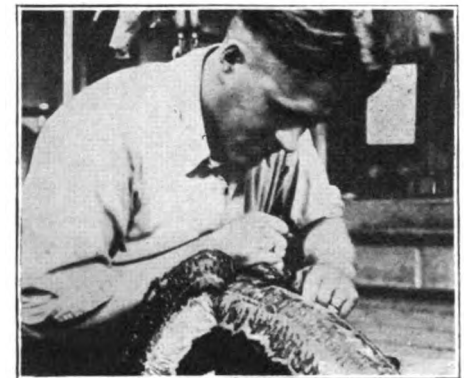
It is Frequently Necessary to Remove Old Gum in Strips.
